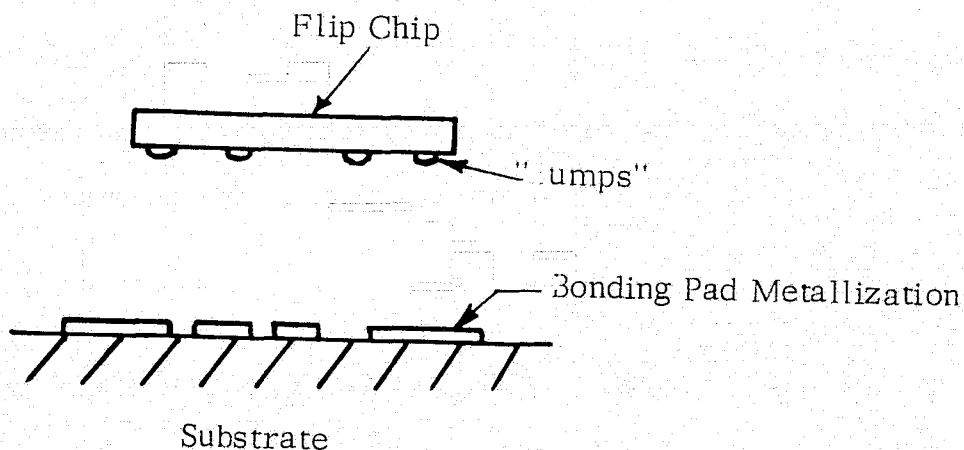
FLIP CHIP MOUNTING METHOD
